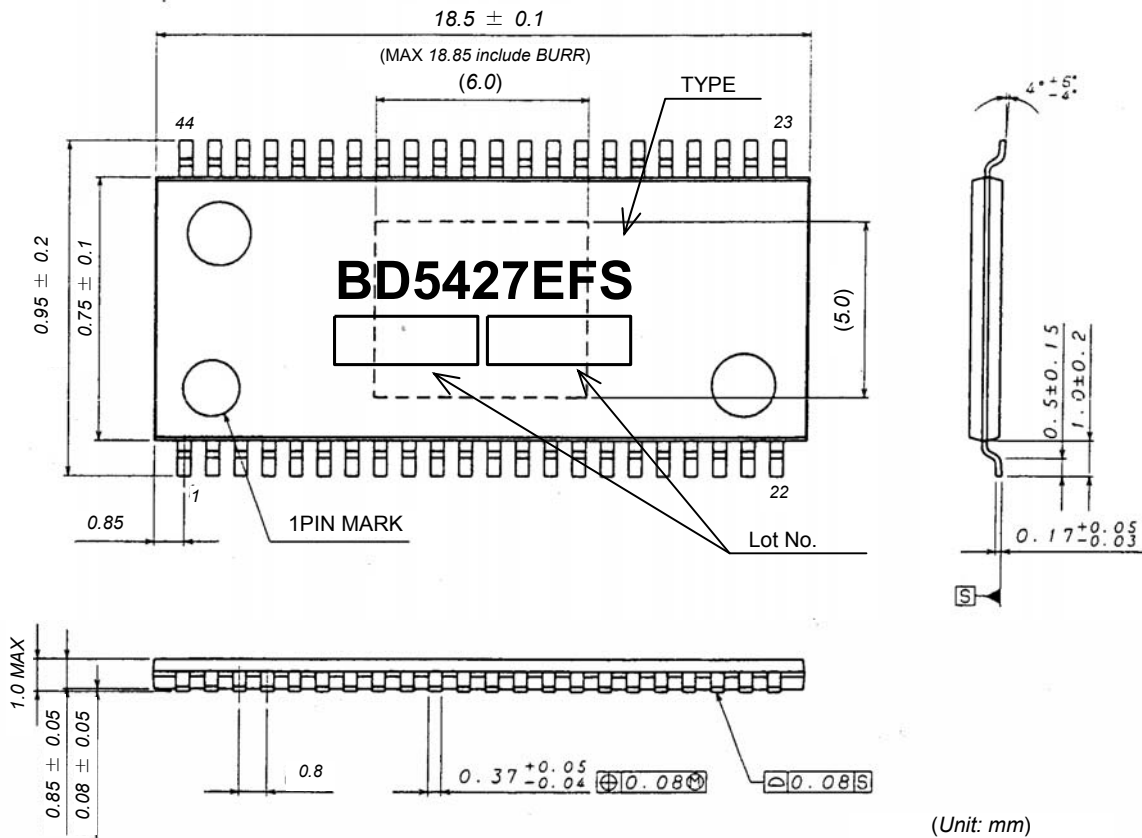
Outer Dimensions and Incriptions of HTSSOP-A44 Package
